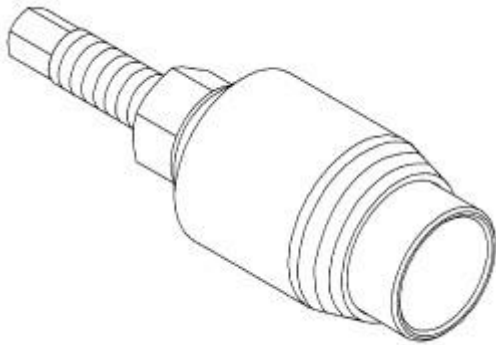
Engine Lift Fixture Adapter - 8984-EAGLE
